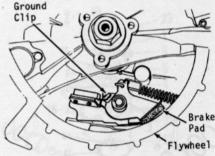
Some engines are equipped with flywheel band brake system.
